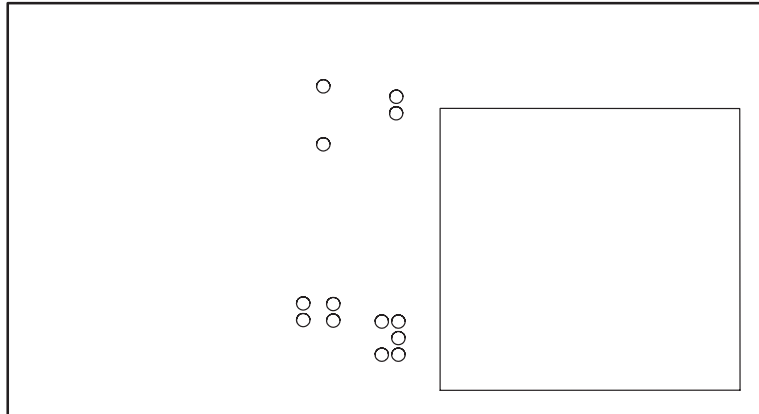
TRF1400 Test Circuit Board Solder Mask — Bottom Side
